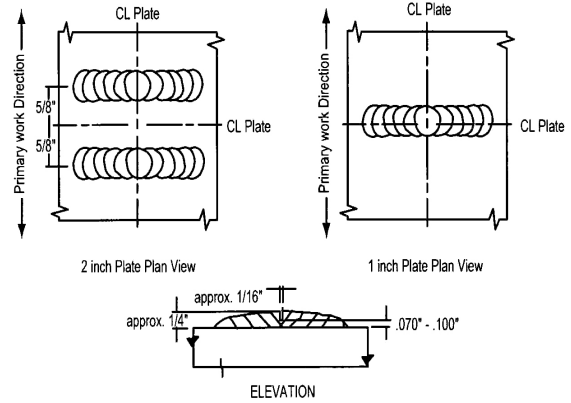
Crack starter bead configuration for base metal evaluation without a weld joint
